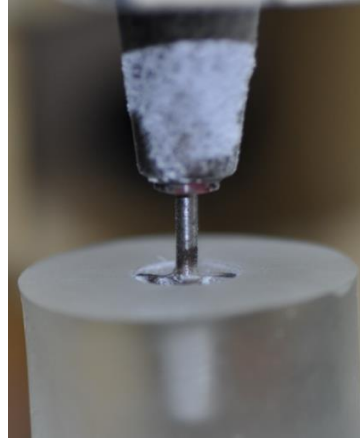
Preparation of defect morphologies with 30° opening angulations using 30° burr and a part of milling machine
